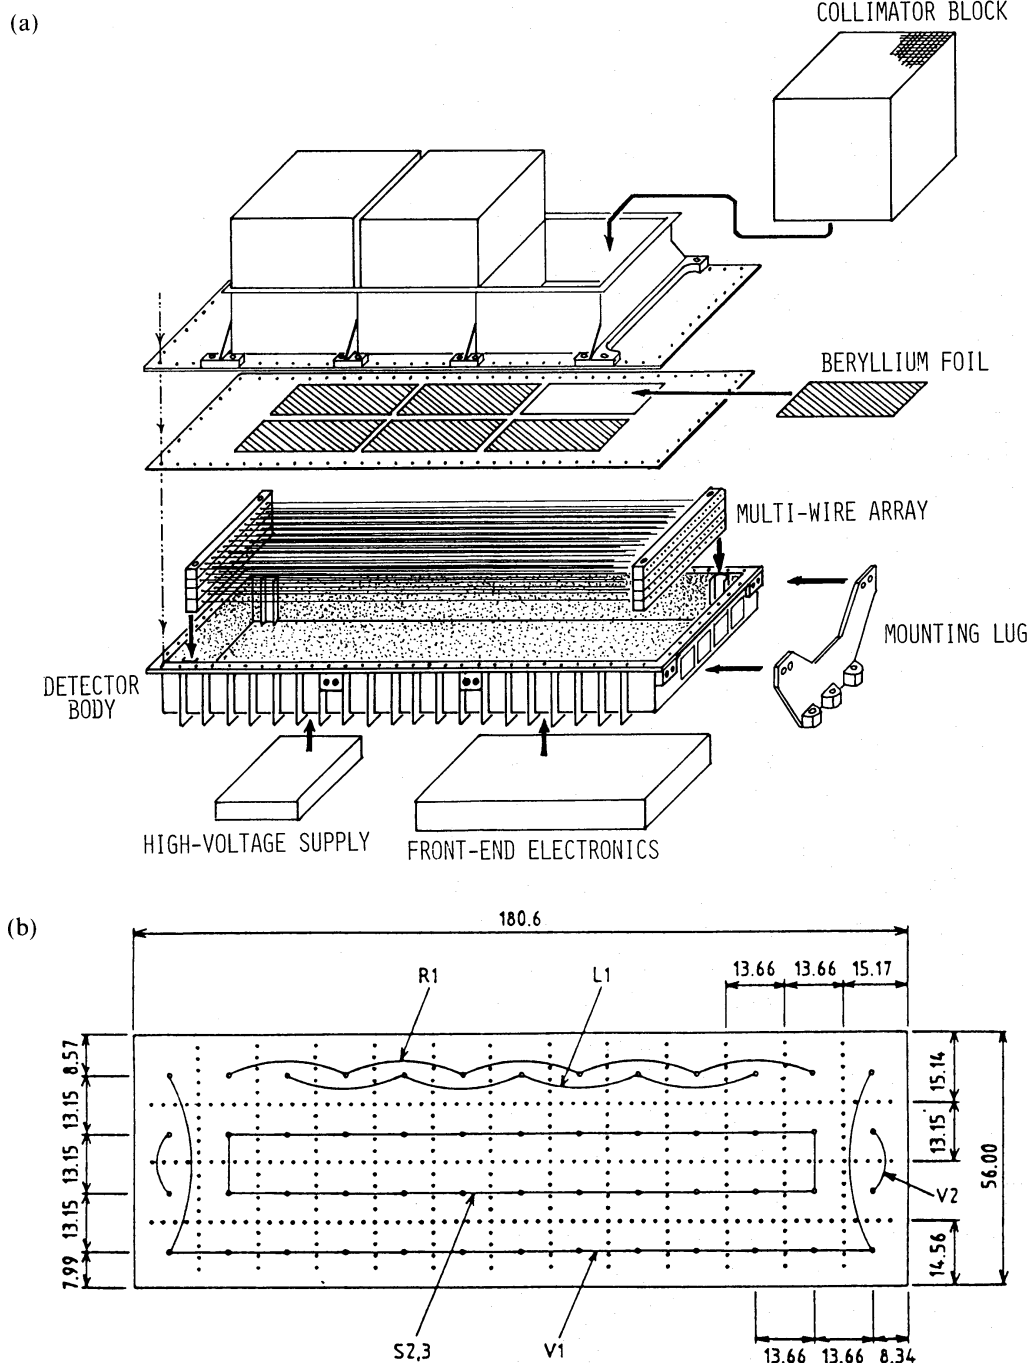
(a) An exploded view of a LAC detector, showing the components.
